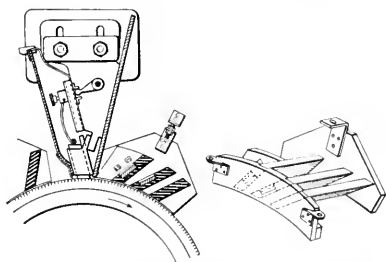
Perspective of Flash Barrier and Section with Radial Brush Rigging
